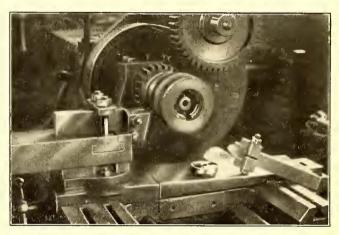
TROLLEY WHEEL CHUCK AND FORMING TOOL FOR OUTSIDE SURFACE
